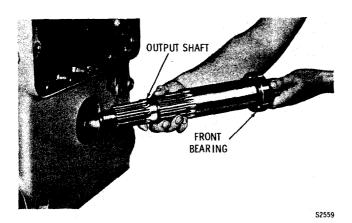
Removing output shaft (-1 models with one-piece output shaft)
